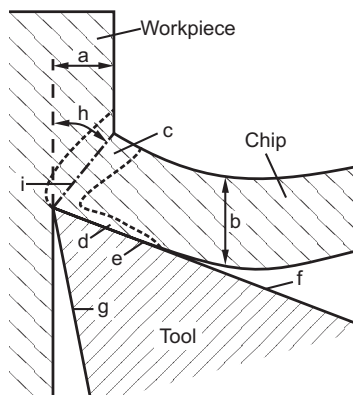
Chip formation with orthogonal cutting. a, cutting depth; b, chip depth; c, primary shearing zone; d, secondary shearing zone; e, contact zone; f, chip surface; g, front clearance; h, shearing angle; i, shear plane; b/a chip compression.
